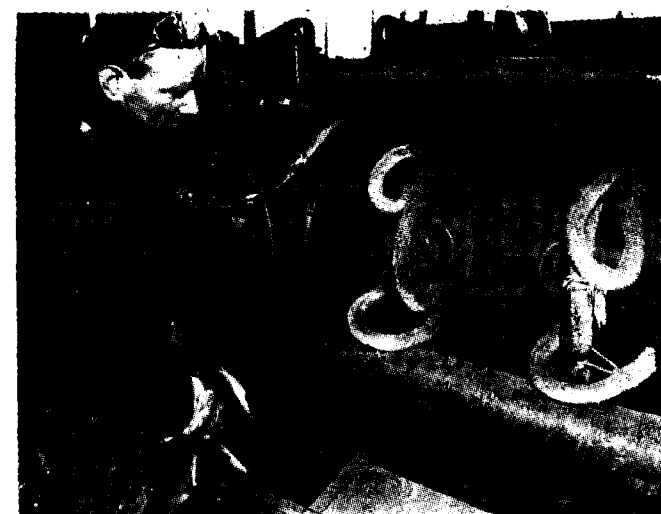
Close-up of the Working Zone of the Machine shown in Fig. 1. The Weld Cycle, including Preheating and Forging, is fully automatic.
